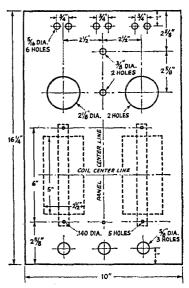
Panel layout of holes, showing dimensions of balun coils. Coil centers should be at least 4½ inches apart.
